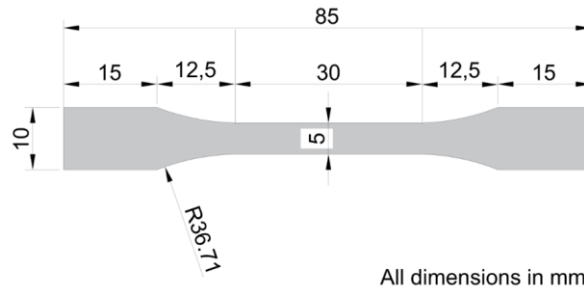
Geometry and dimensions of transverse tensile test specimens
